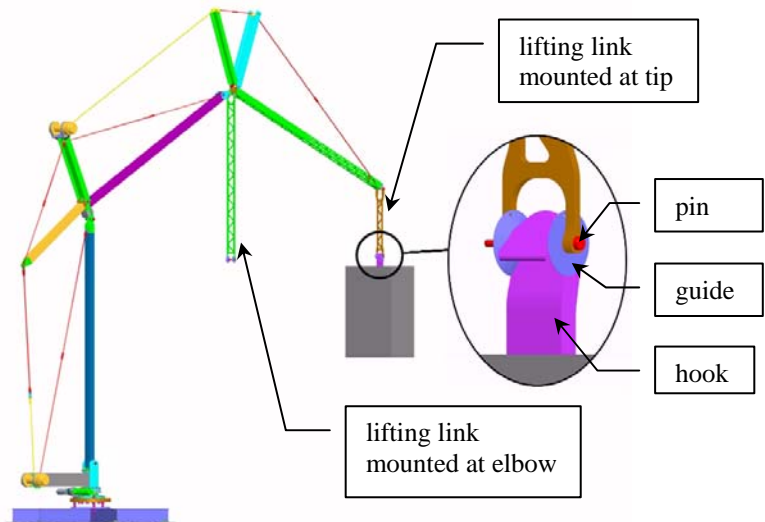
Lifting Links Provide Structurally Stiff Connection to Payload
